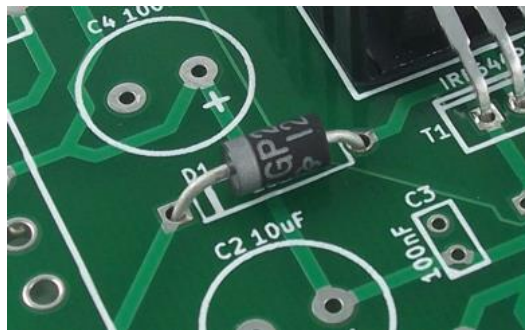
A part of a PCB showing the Solder mask and Silkscreen
